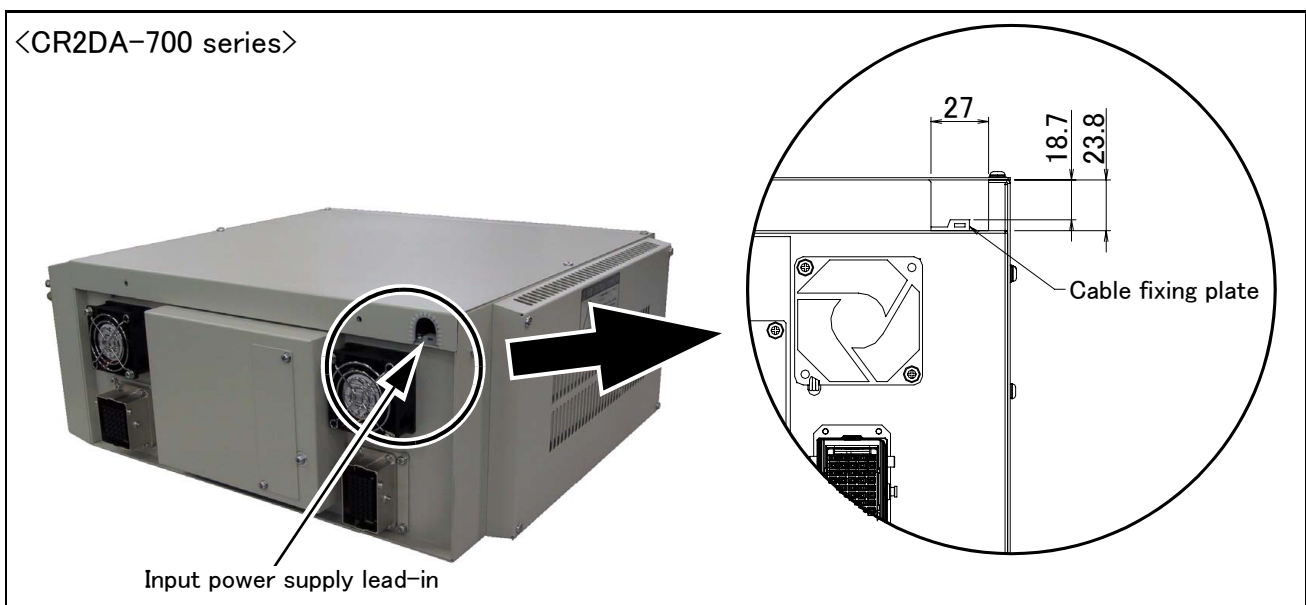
Cable lead-in and dimension of the controller (CR2DA-700 series)
